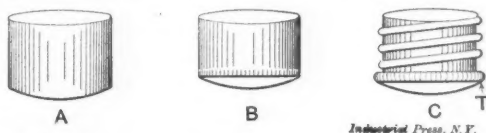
A, The Blank. B, The Blank after Knurling. C, The Completed Cap.
